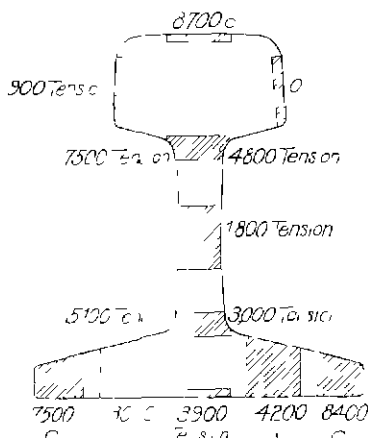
Cross section of new 100 pound rail. Internal stresses after cold rolling with an blast
